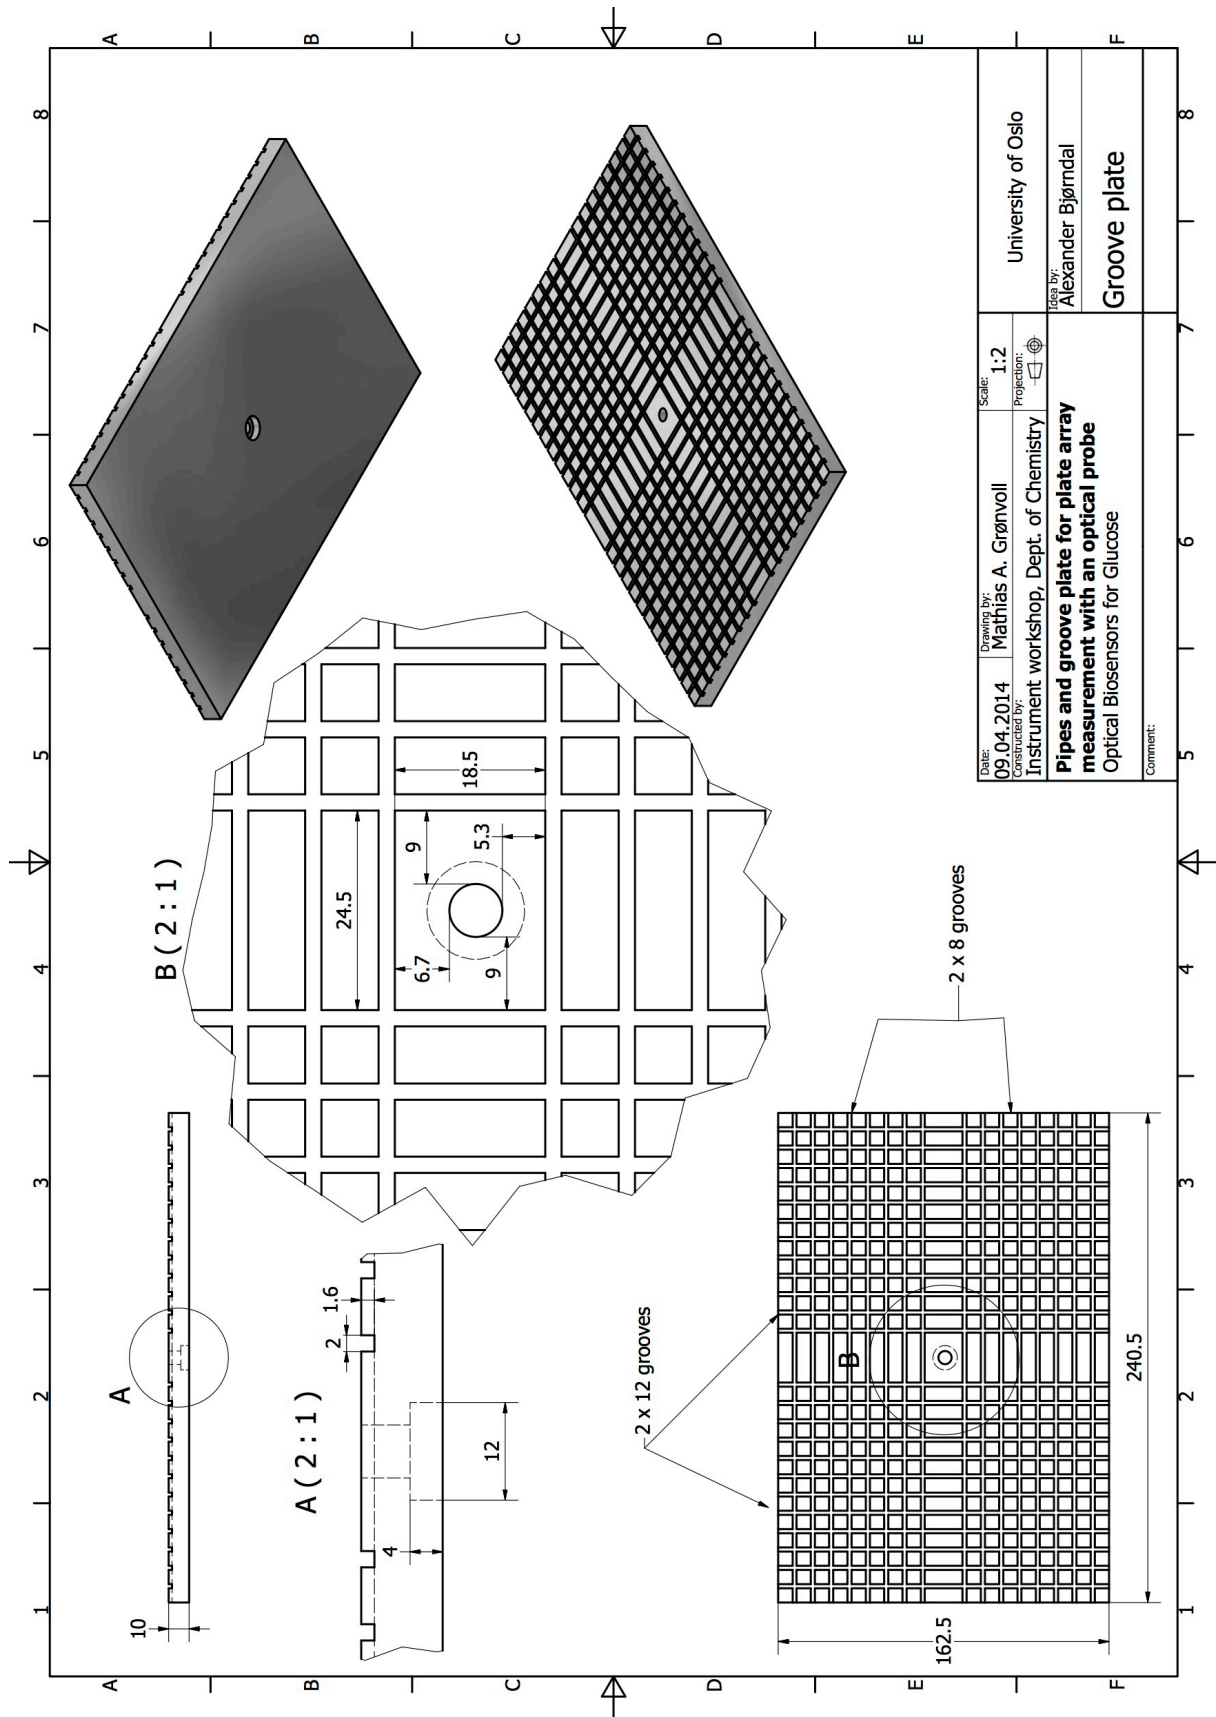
Groove plate used in the setup for plate array measurement with groove plate and pipes.
